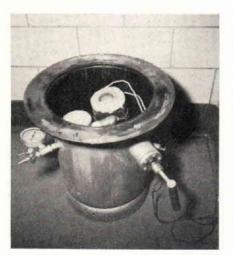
Furnace, mold, and container for pouring aluminum in vacuum.
